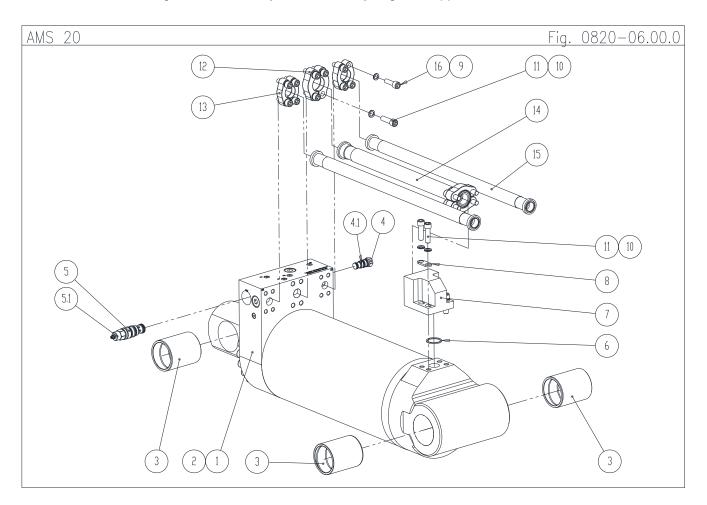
Cylinder Assembly. Figure is applicable to AMS-R.
